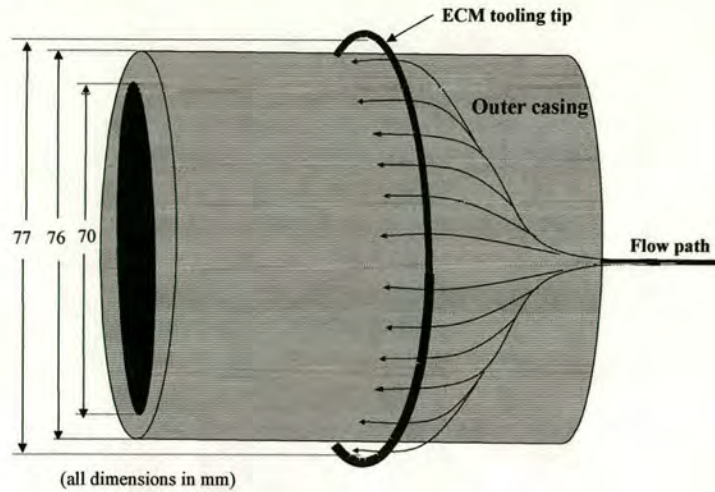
Tooling configuration and dimensions for ECM slicing of outer casing
